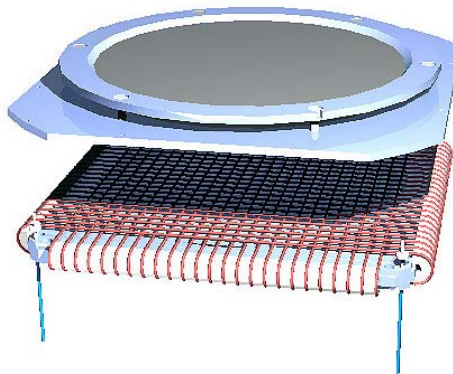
Assembly of MCP-stack - Stage 4 (DLD120 and HEX120)
